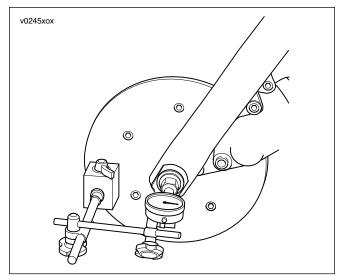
Measuring Lateral End Play (Front Wheel) (typical)
